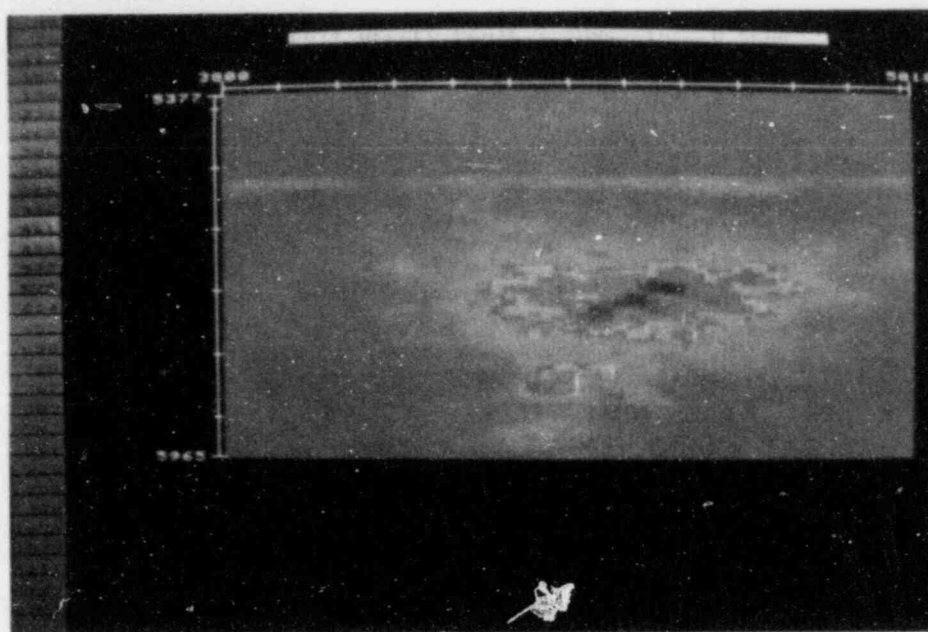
BUTT-WELDED CARBON STEEL PLATE SPECIMEN - HEAT-AFFECTED
